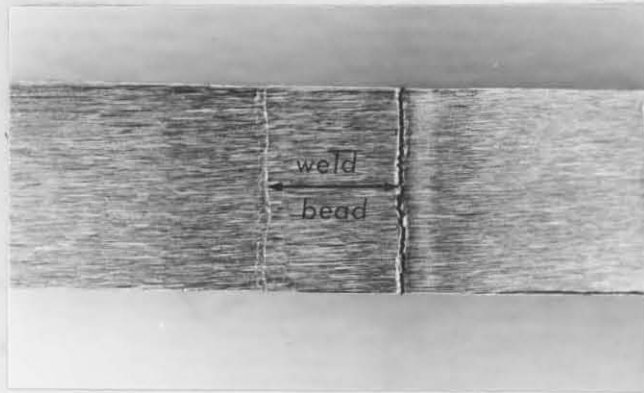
Top view of a hot rolled 3CR12 bent specimen welded with E3CR12. The brittle fracture which occurred in the HT HAZ is clearly evident together with the local plastic deformation in this zone on the left hand side of the weld bead.
